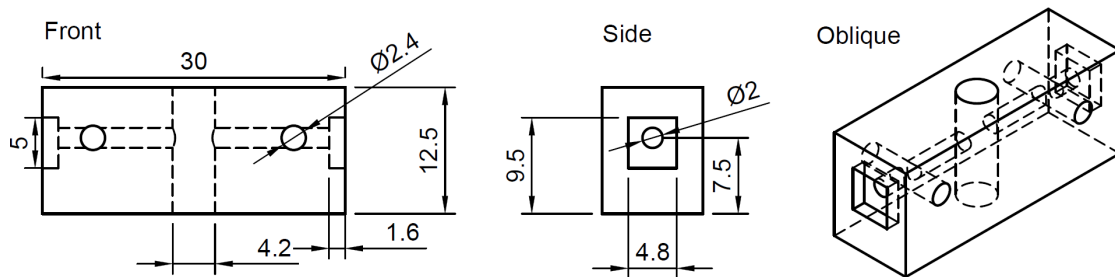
Technical drawing of sensor block, incorporating two parallel holes through which the outlet tubing from the T- and S- channels are separately threaded, plus a third orthogonal through-hole that allows light to pass through the two channels. A void in the centre of the block houses a light-emitting diode, while recesses on opposing faces of the sensor block house the two light-to-frequency converters. Dimensions are in millimetres.
